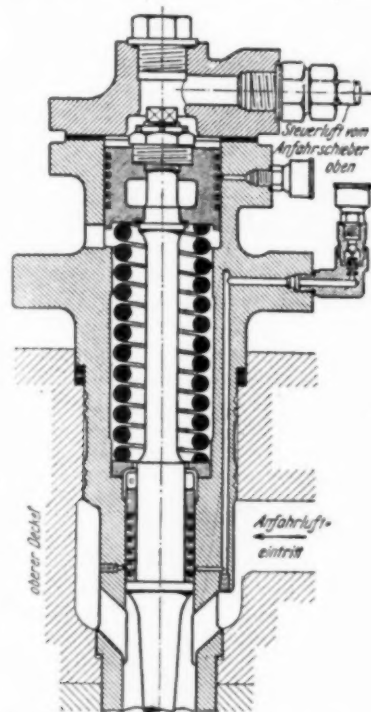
STARTING VALVE OF THE UPPER PART OF THE CYLINDER OF THE DOUBLE-ACTING TWO-STROKE-CYCLE ENGINE
